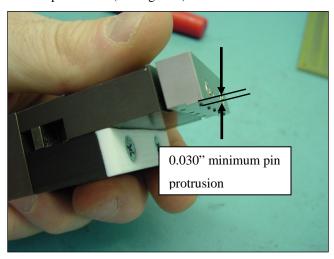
Stiffener removal pins protruding out the bottom of the pin block.
